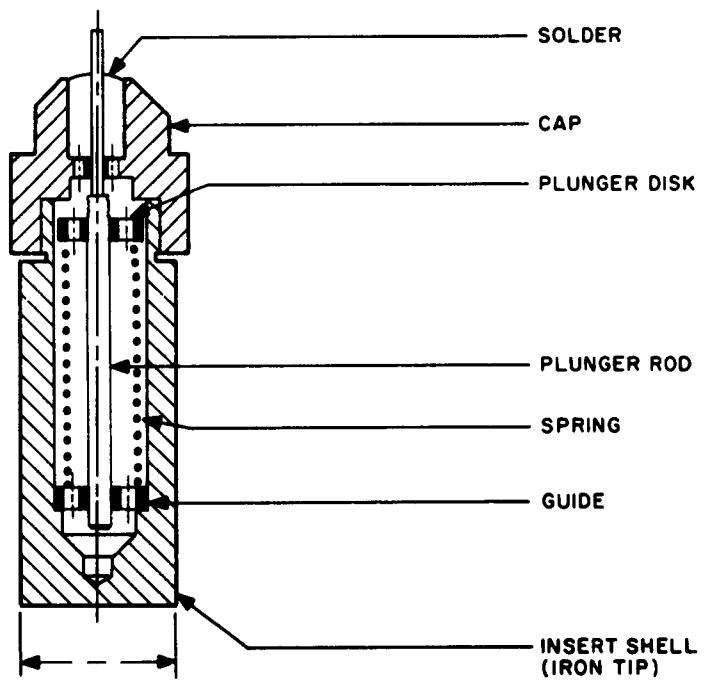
Micro-Module Unsoldering and Ejector Head (Sectional View)
